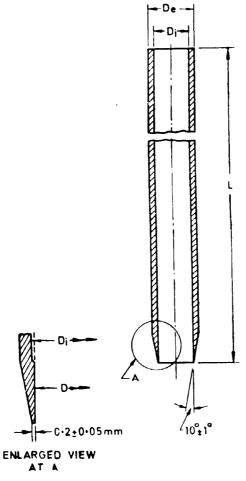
DIMENSIONS OF SAMPLING TUBE
